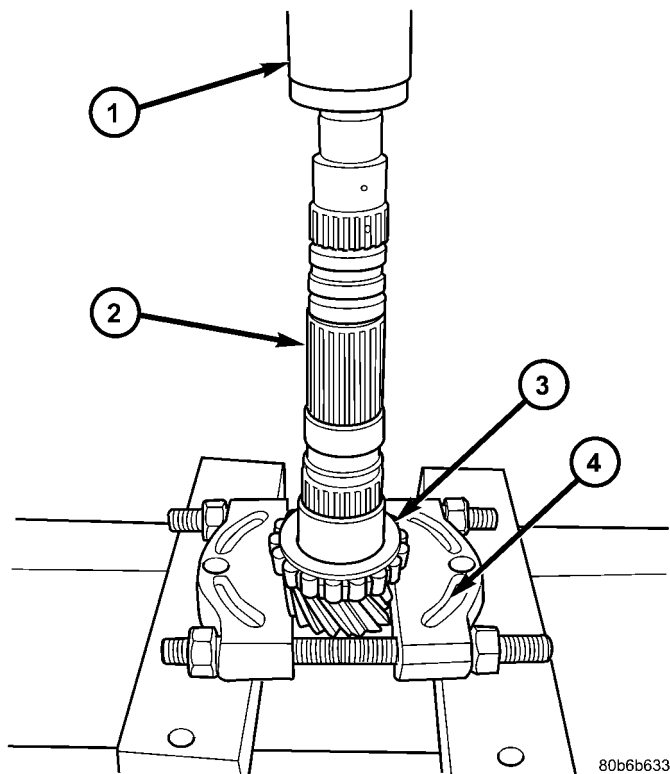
Intermediate Shaft Roller Bearing Snap Ring
